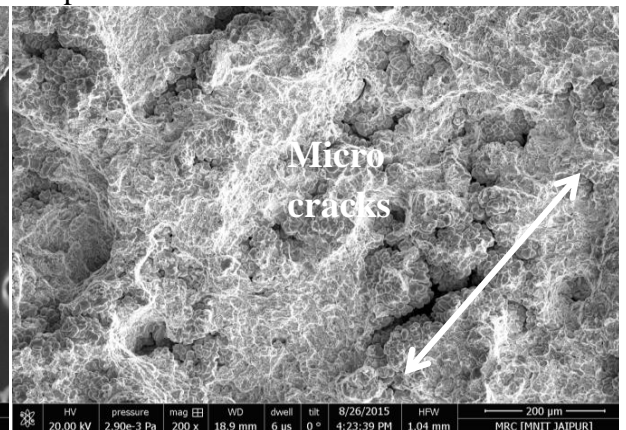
SEM fractographs for 7.5 wt.-% of CaO particulate filled ZA-27 alloy composites after fracture test
